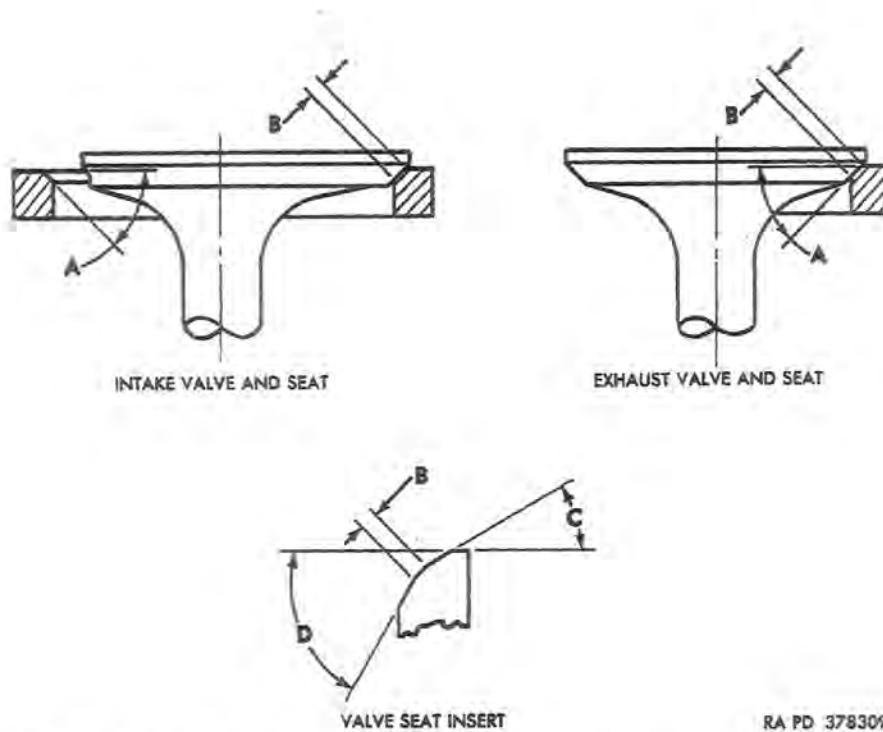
Repair and rebuild standard points of measurement for intake and exhaust valve seats.
